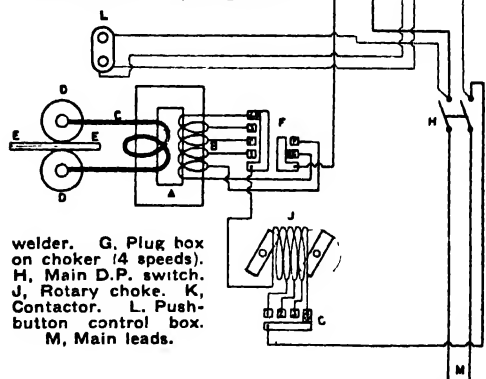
Connexions for seam welder. A. Magnetic circuit. B. Transformer primary winding. C. Transformer secondary winding. DD, Electrode rollers. EE, Material to be welded. F, Plug box on
